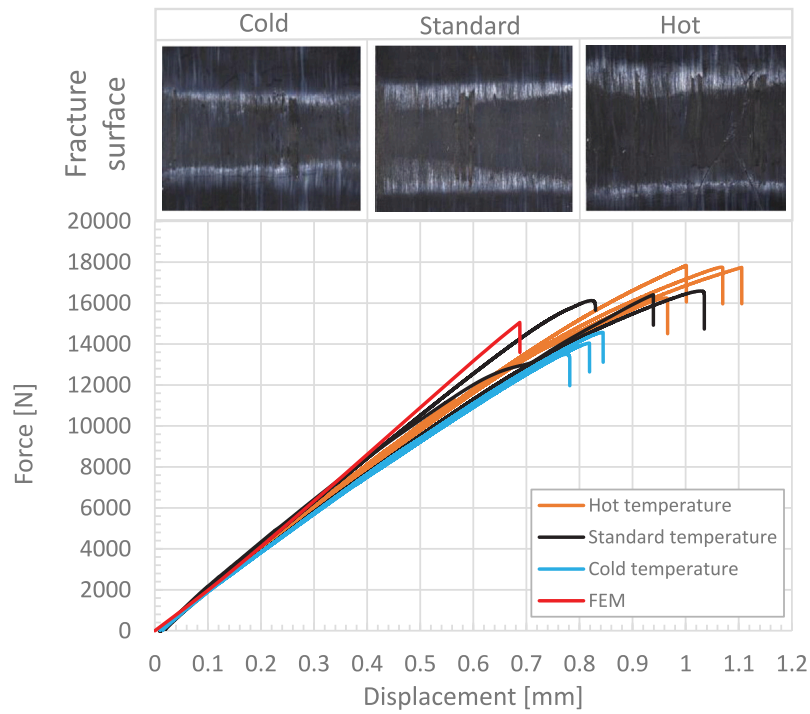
SLS tensile load-displacement curves: Weld size based on fracture surface for three weld temperatures.
